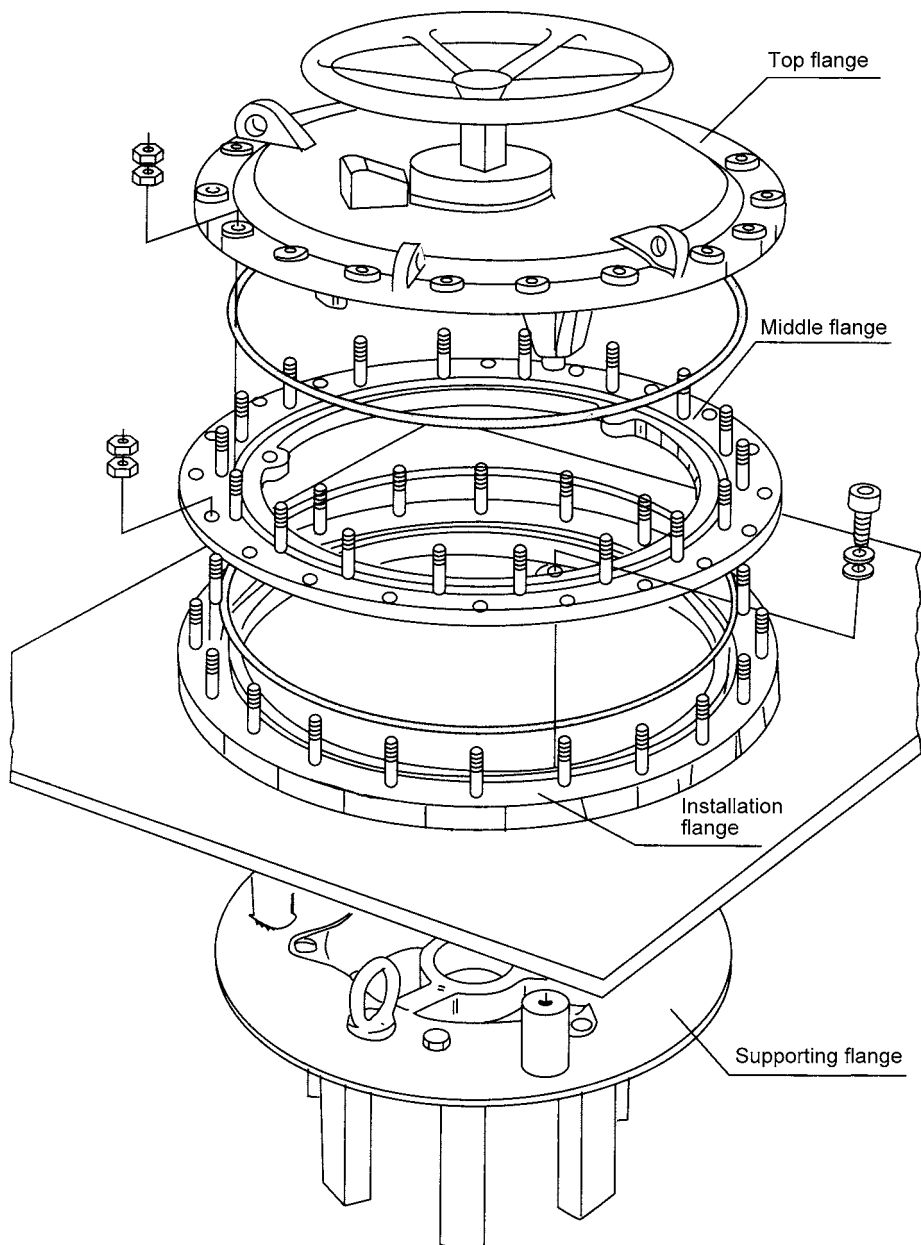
Installation diagram of the tap changer mounting on the bell type transformer
